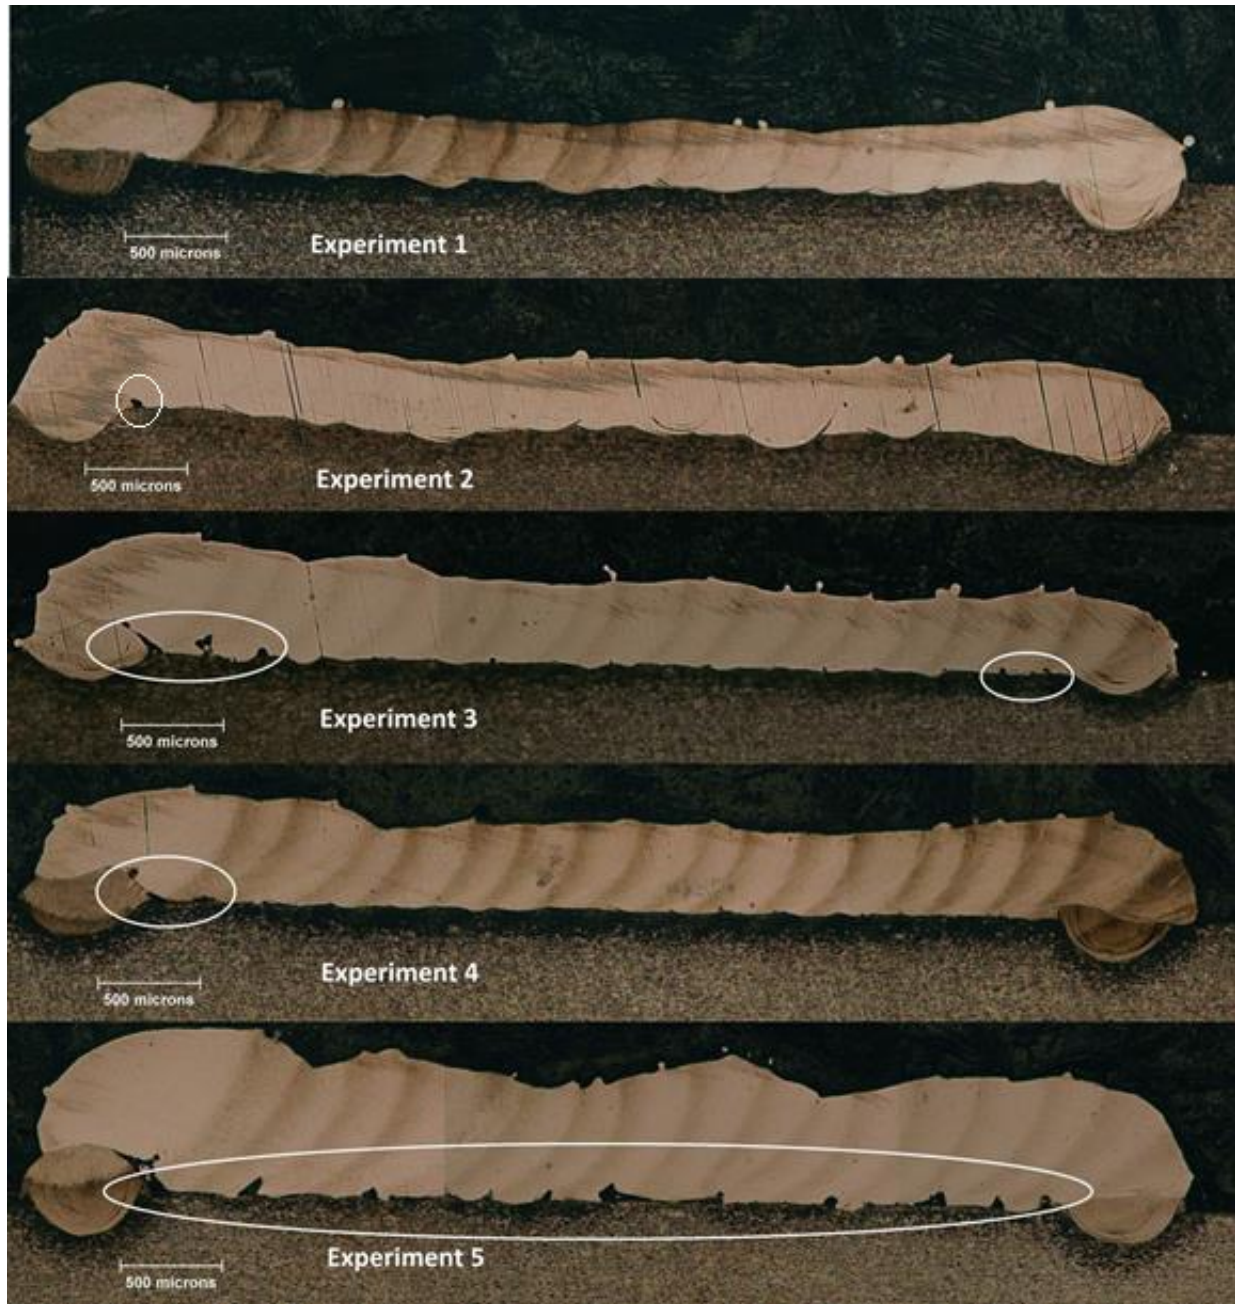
Cross-sectional view of the single-layer deposition tracks from Experiments 1-5. White ovals indicate porosity.
